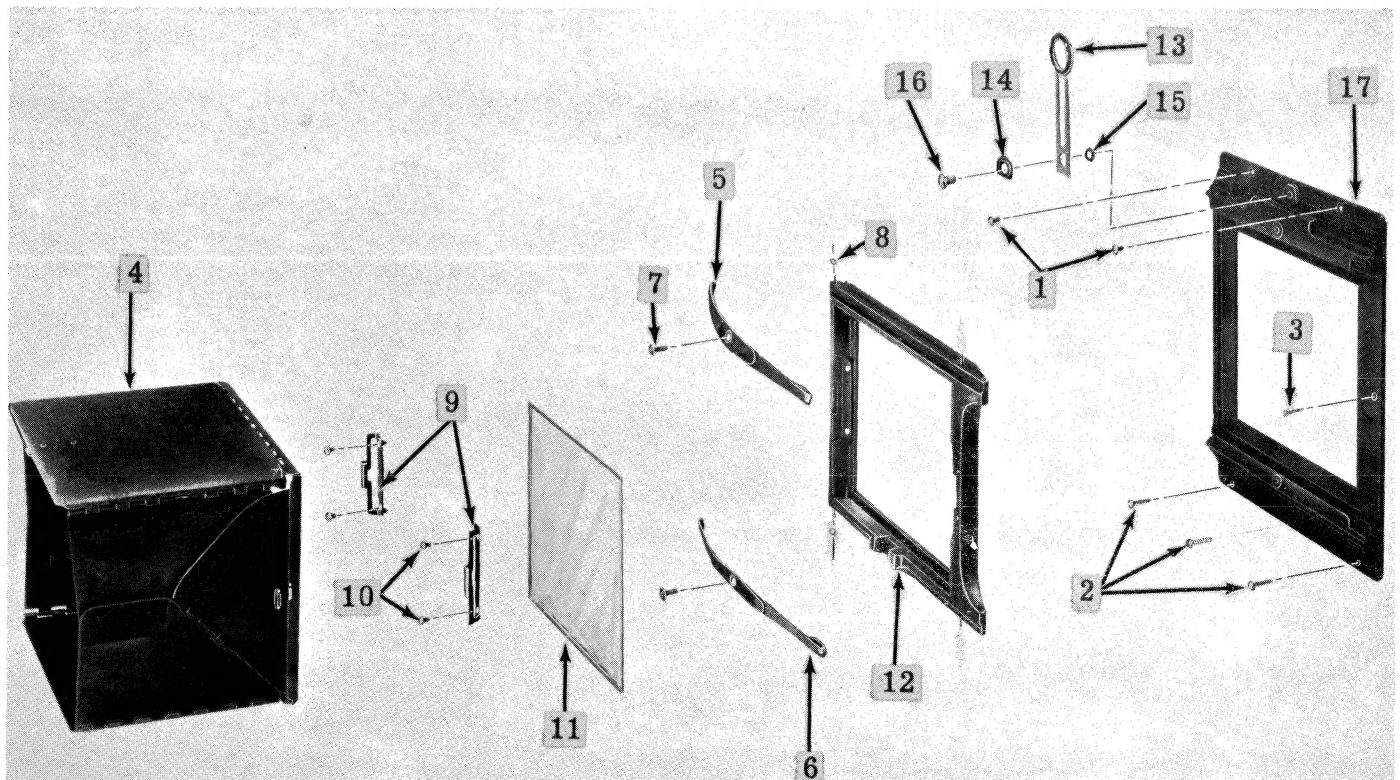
4 x 5 Graphic Camera Back, Exploded View
